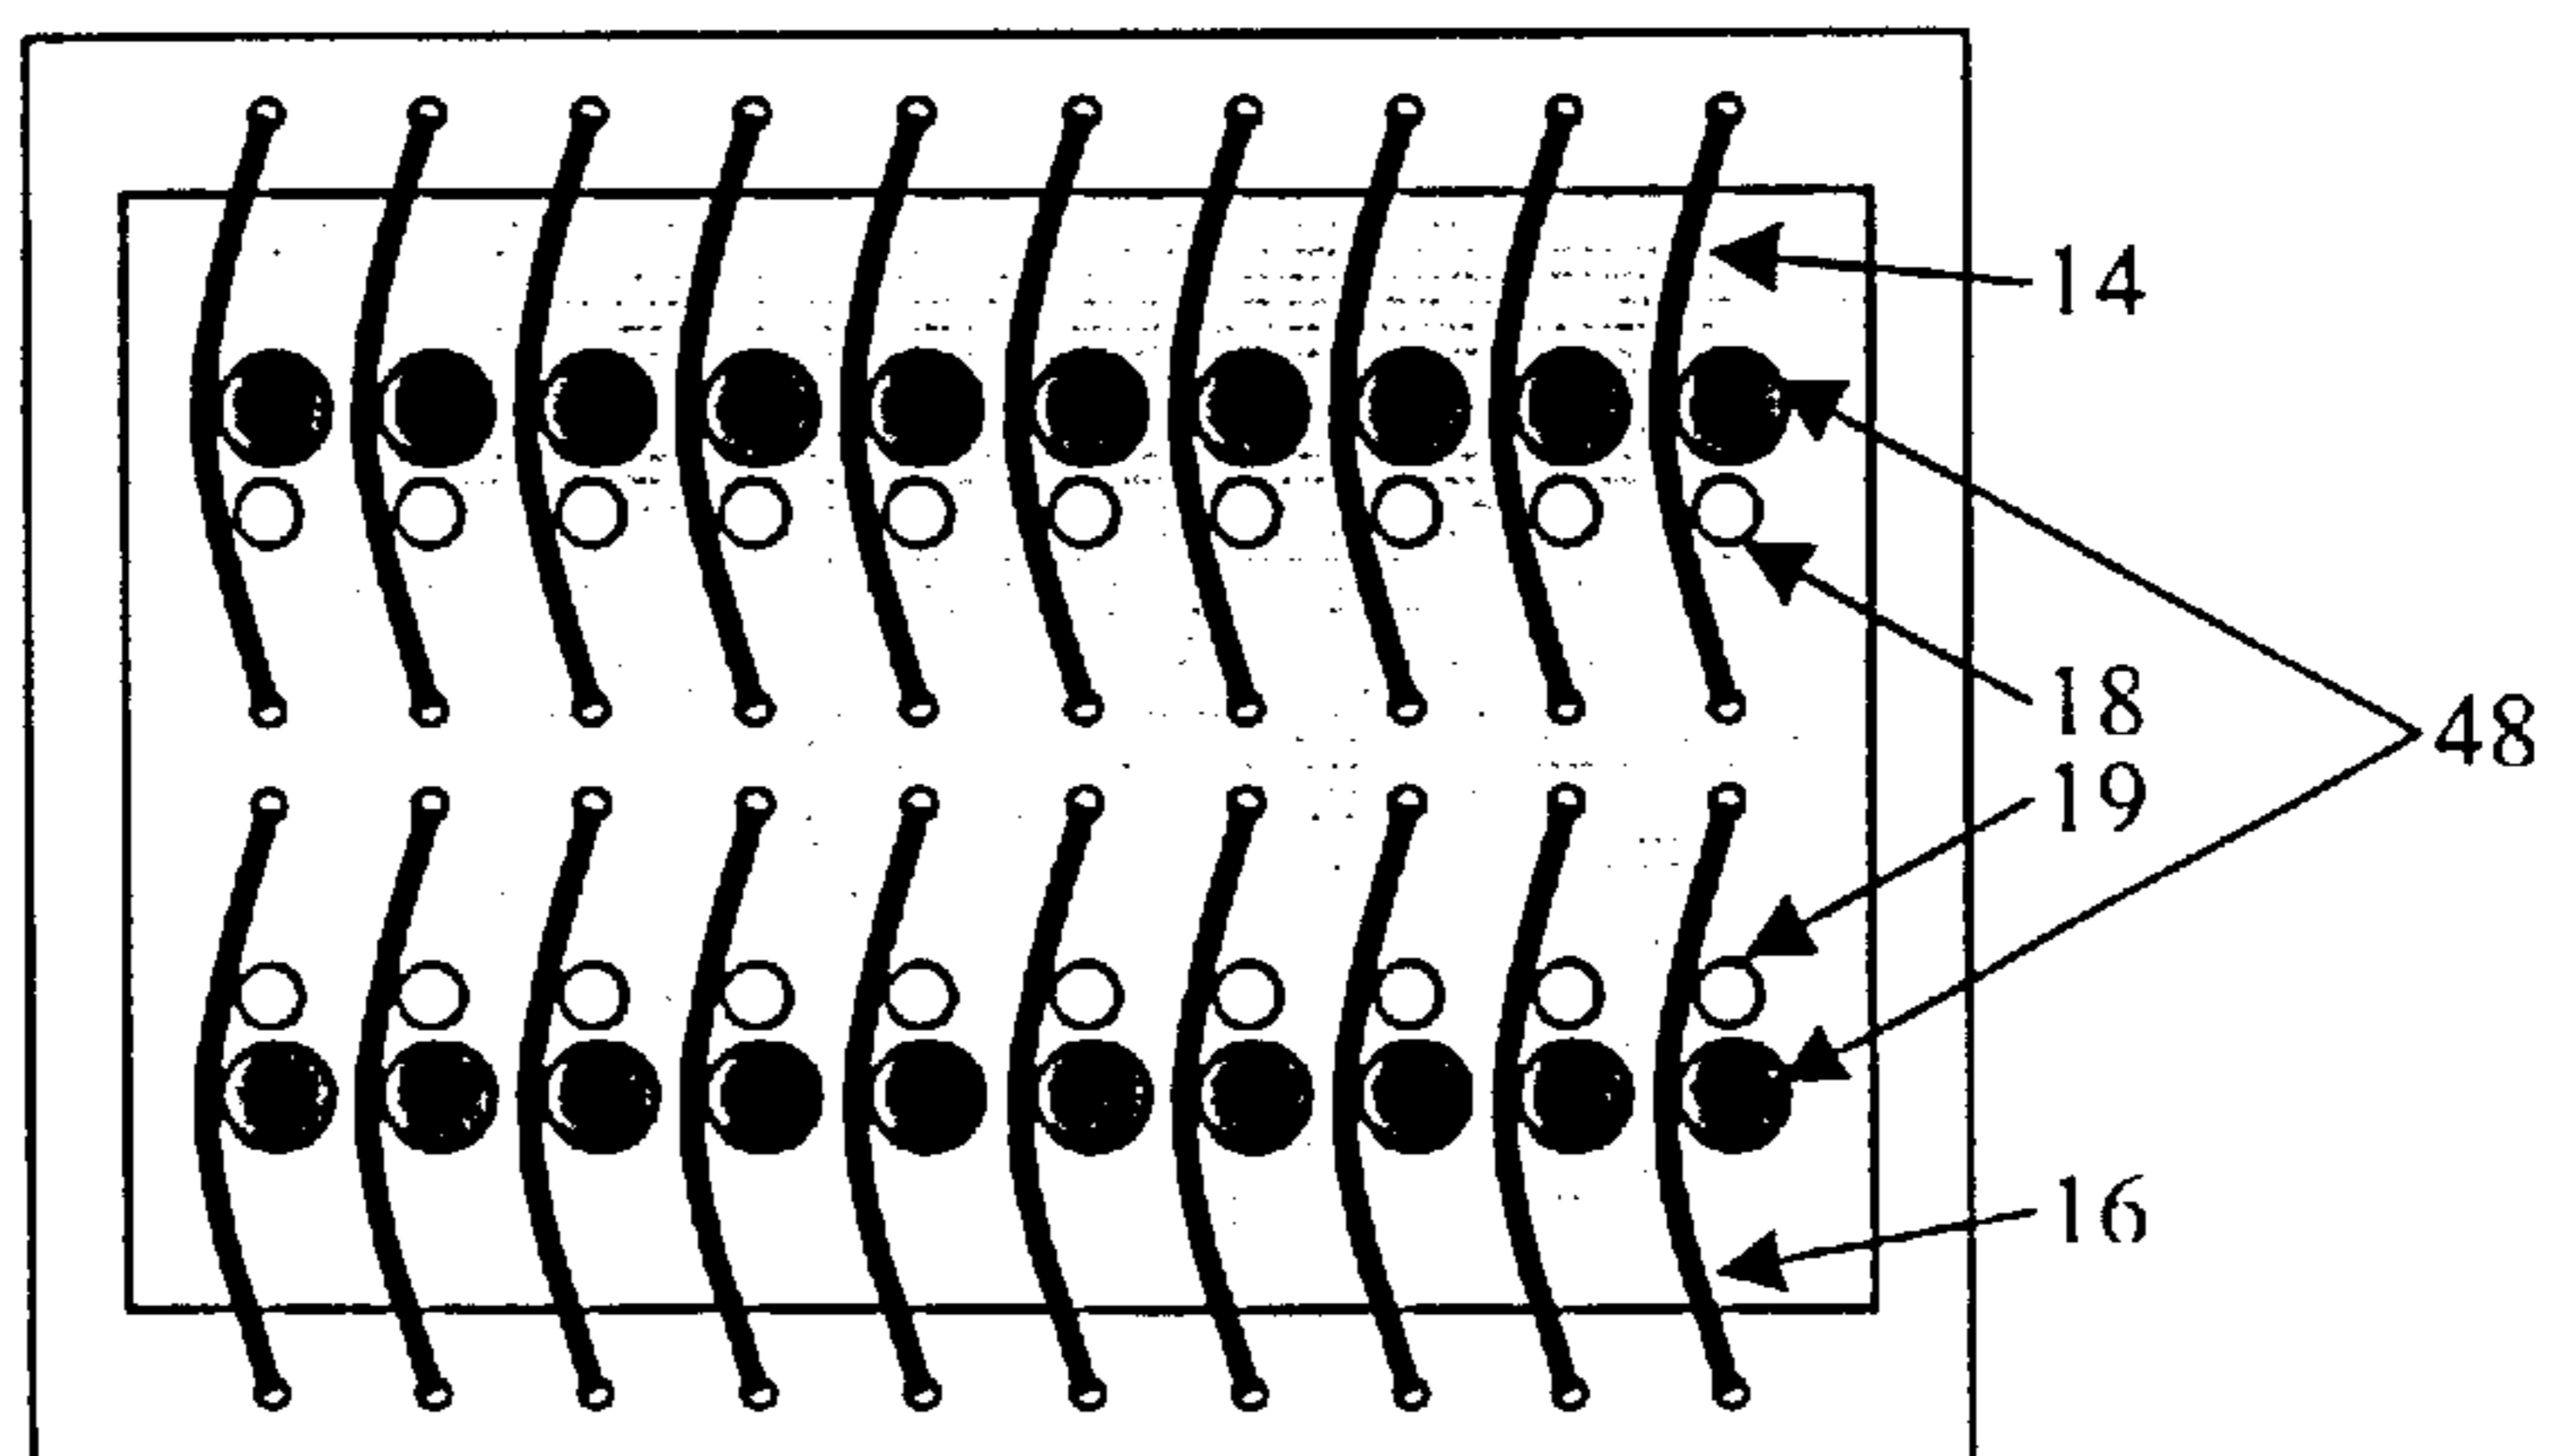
Actuated Position - Actuator 1 mated with new ZIF socket
